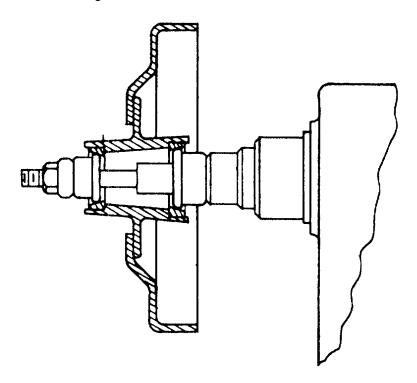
TAPERED BEARING EQUIPPED HUB
